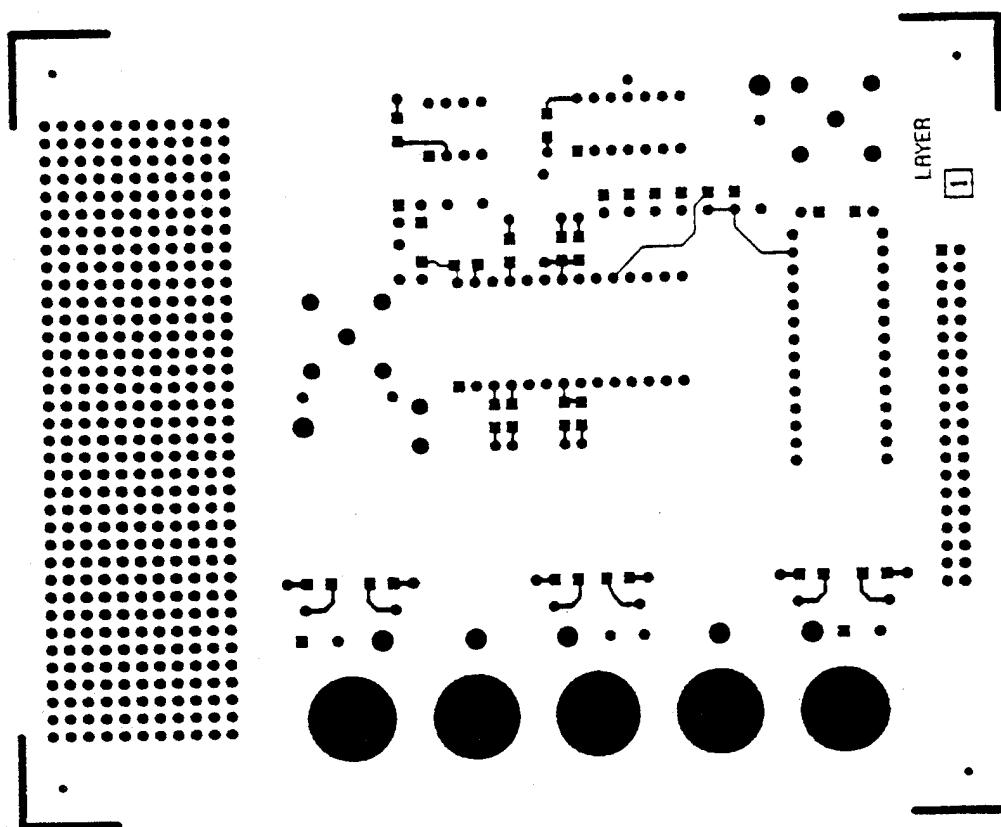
Component Side PCB Layout (Not Shown to Scale)
